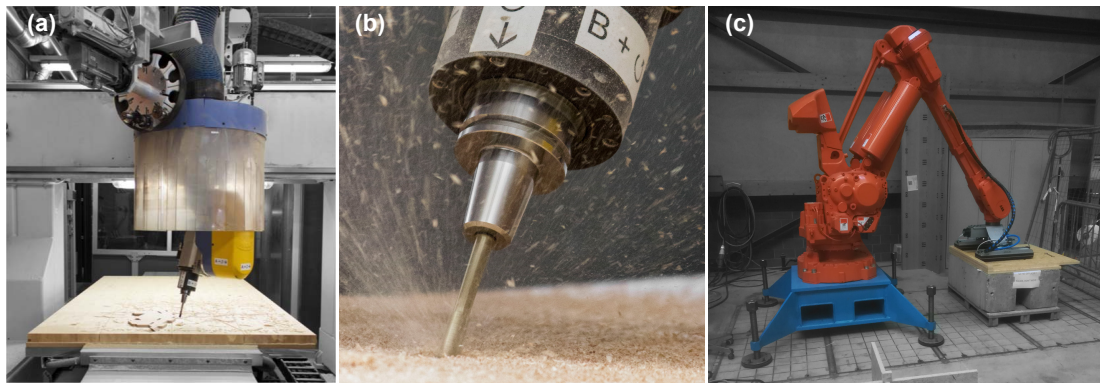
Production tools at IBOIS / (a) five-axis CNC machine / (b) Zoom on the cutting tool during the machining process / (c) six-axis robot when manipulating a panel.
